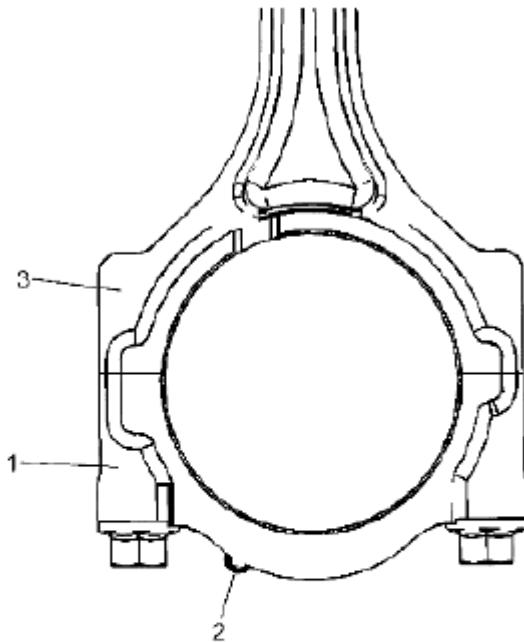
Installing Piston And Connecting Rod Assembly Into Cylinder Bore
